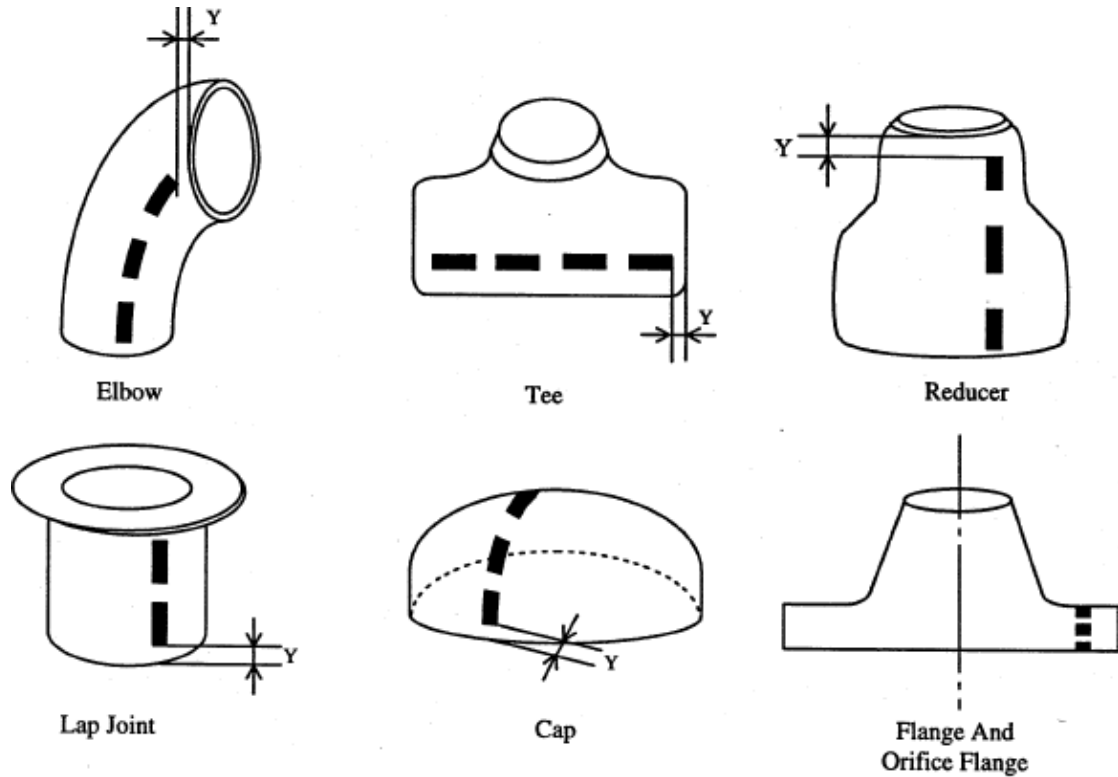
(b) COLOR CODING OF BUTT WELDING FITTINGS AT FIELD (ONE COLOR)
